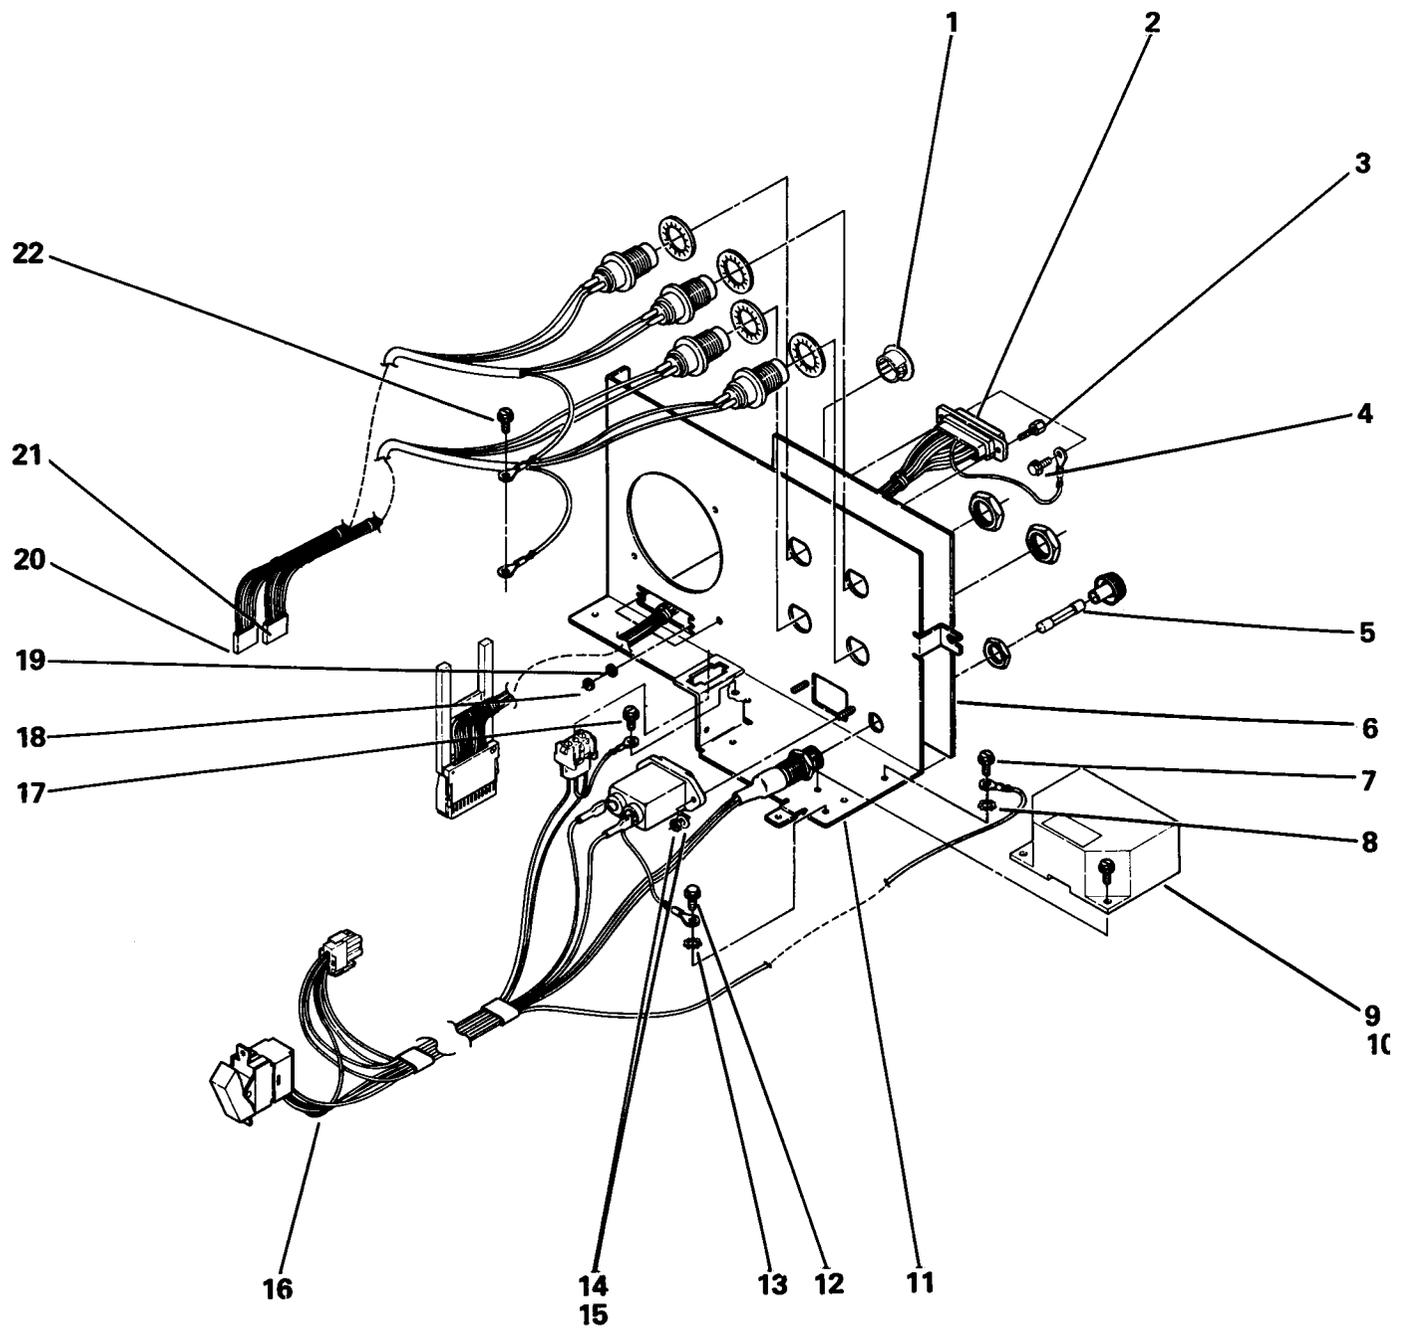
I/O PANEL ASSEMBLY. SEE LIST 4.
